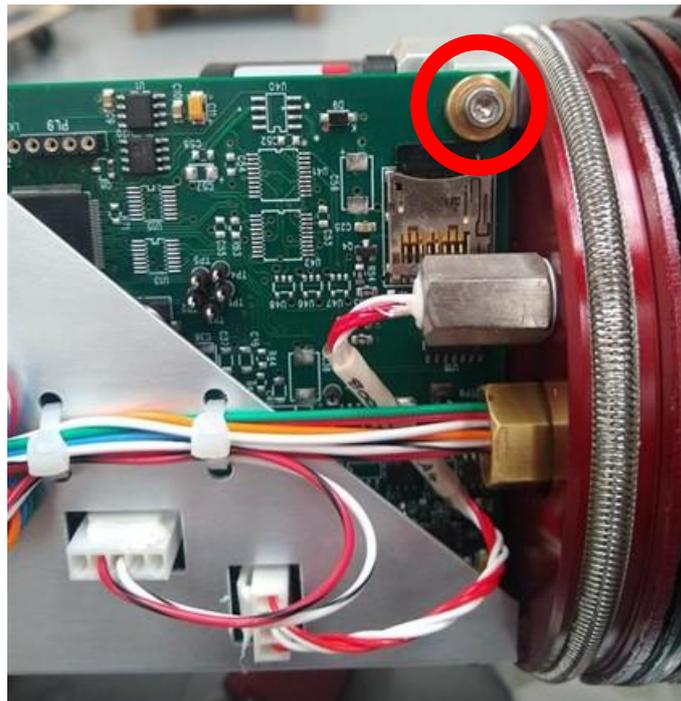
DAS board with MMC exposed as sensor endcap is partially removed
